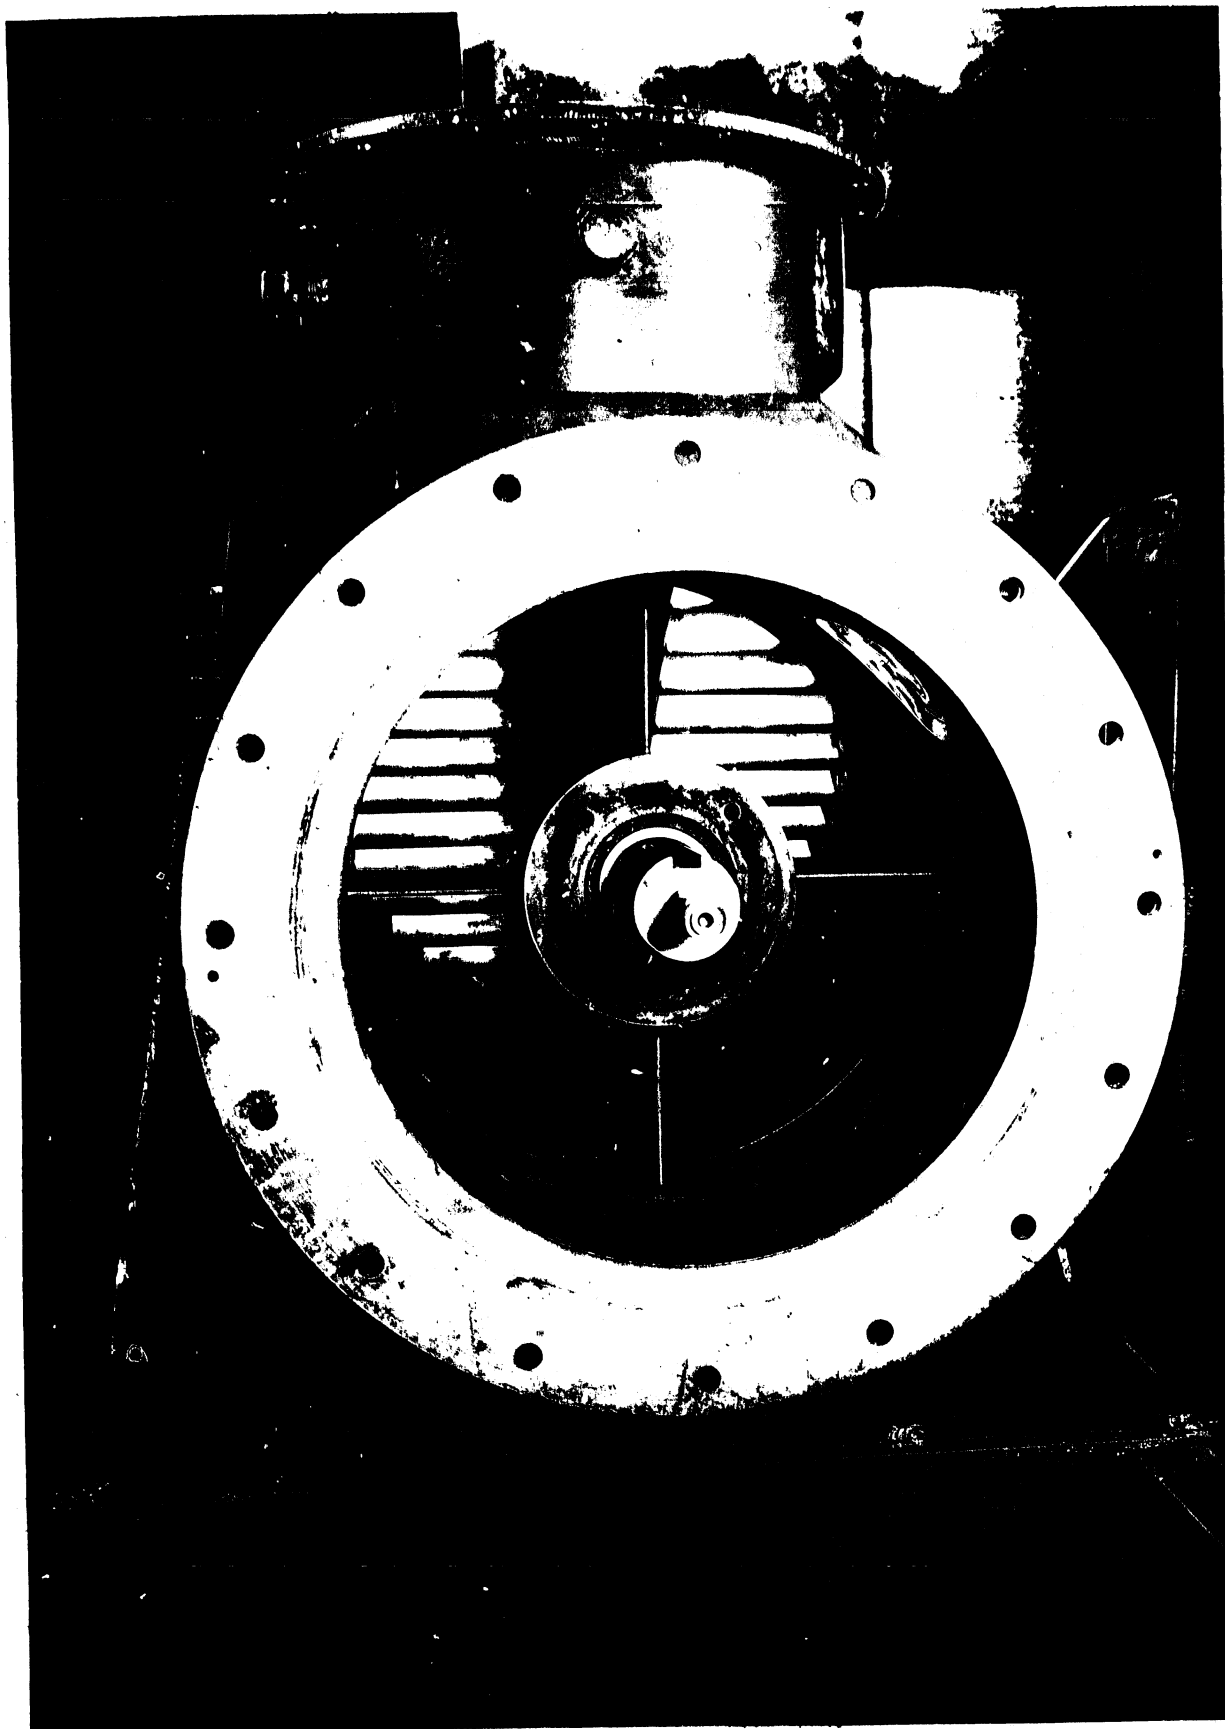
Suction Vanes, Elbow, and Shaft Fairing
